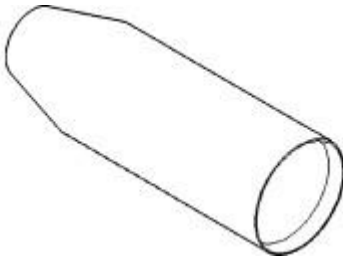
INSTALLER, CRANKSHAFT SEAL - 6780-2
